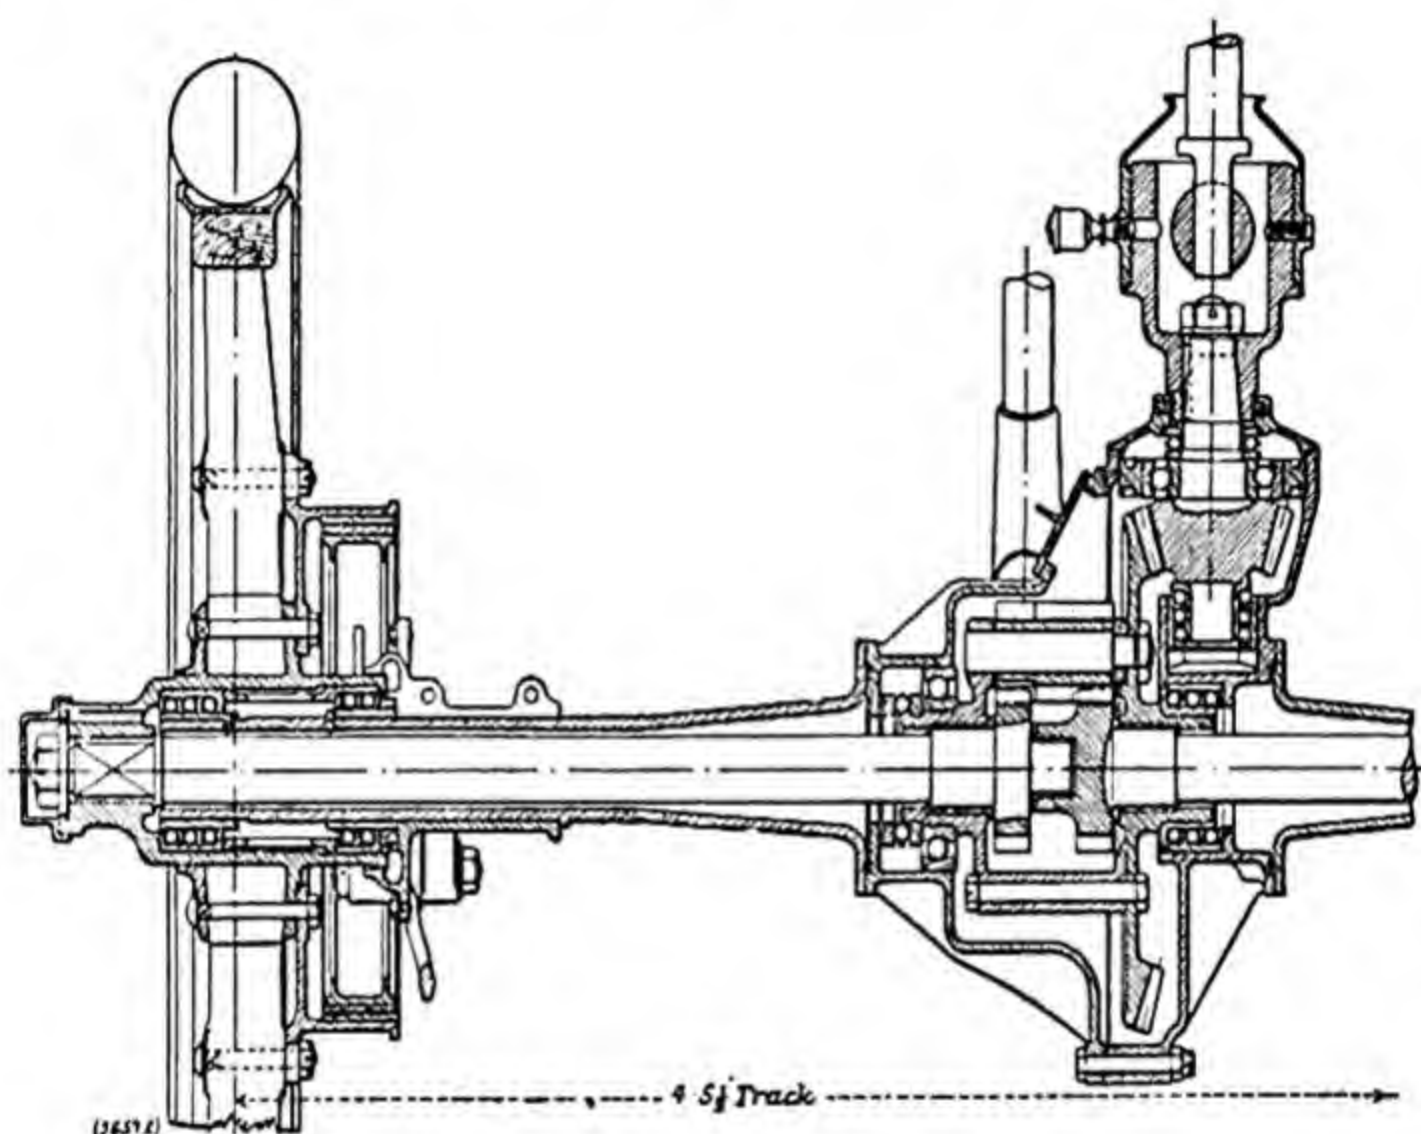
Differential gear and driving axle of the Siddeley motor car.
